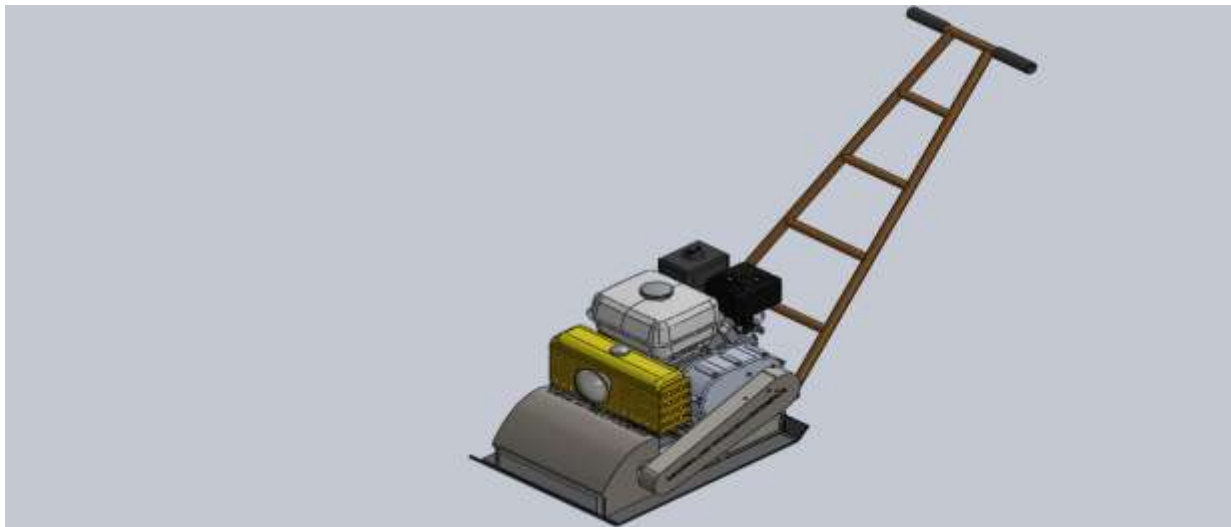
Complete assembly of the walk-behind vibratory plate compactor
